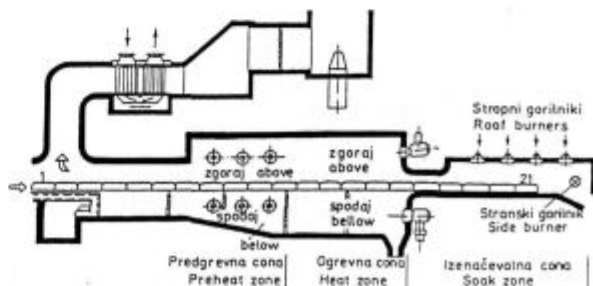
shows the push-type reheating furnace produced by the firm RUST prior to redesigning. The furnace is divided into three zones; the upper and lower heat zones and the soak zone equipped with head burners for natural gas. Design change was performed by the firm Vatrostalna Zenica supported by professional services of Jesenice Steelworks. The first phase of furnace redesign was finished in May 1987. The second
